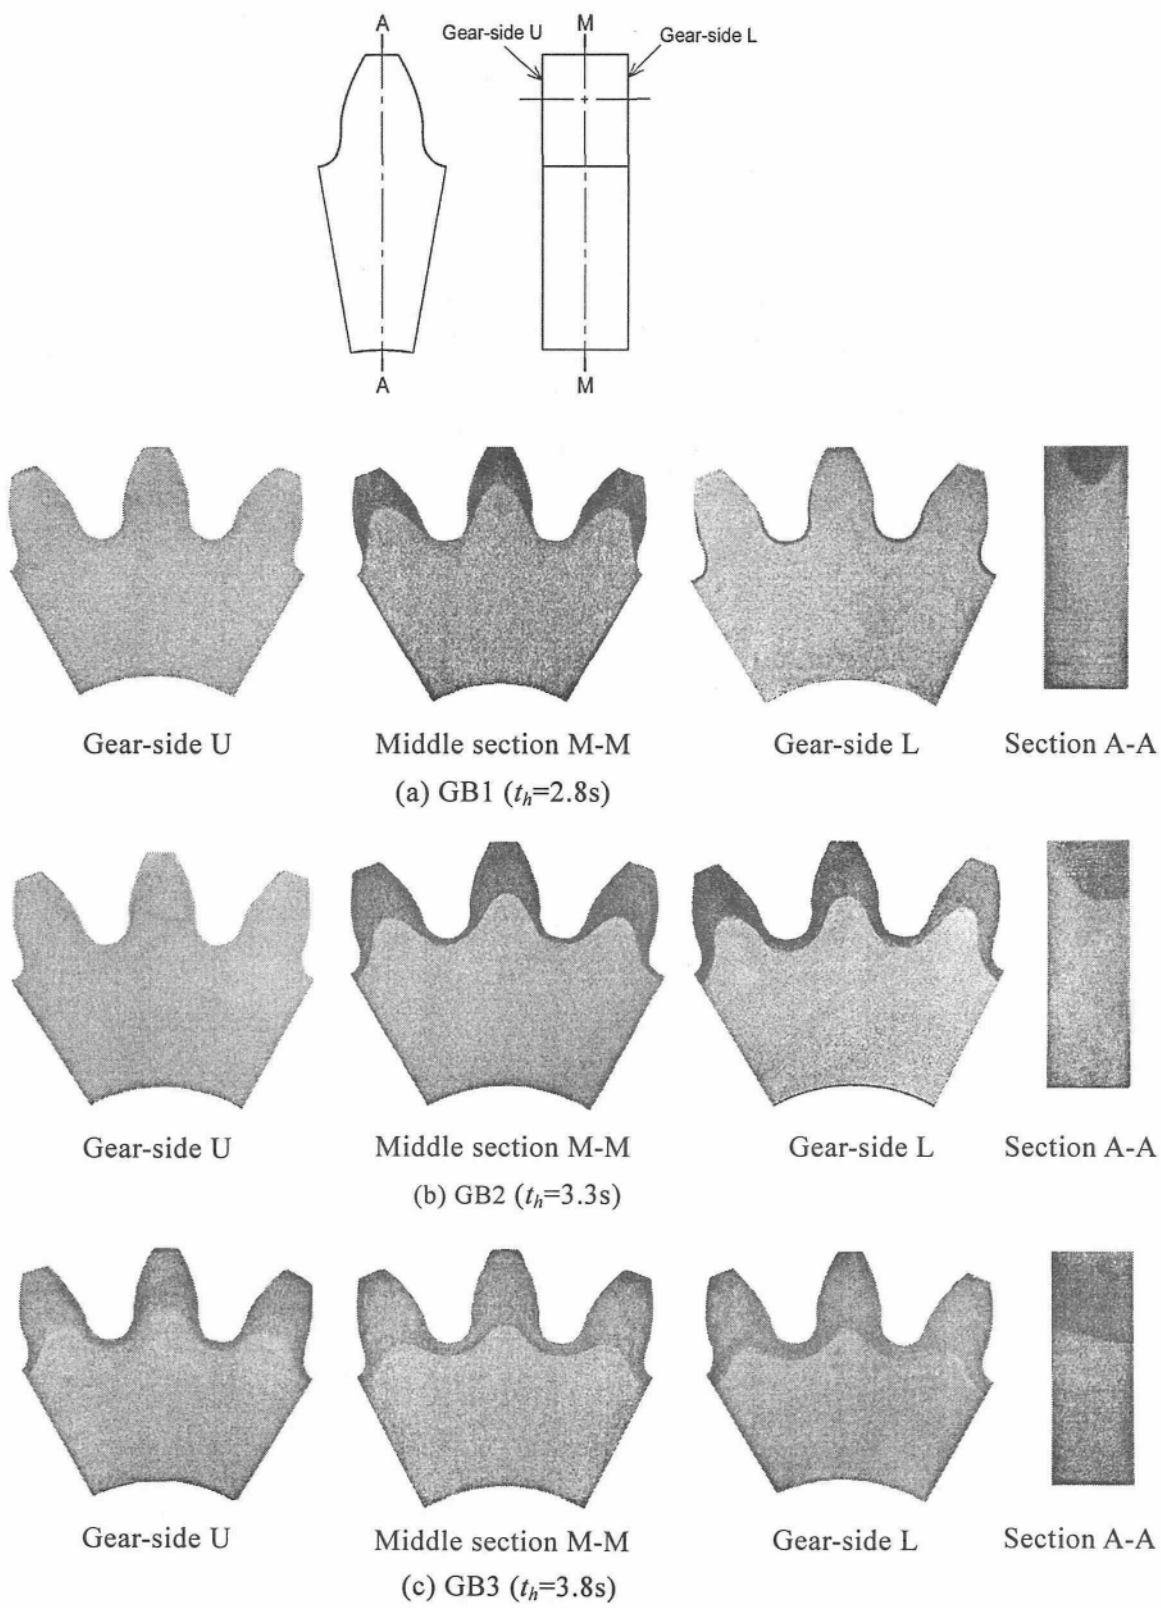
Photographs of macro-structures of test gears (Coil B)
